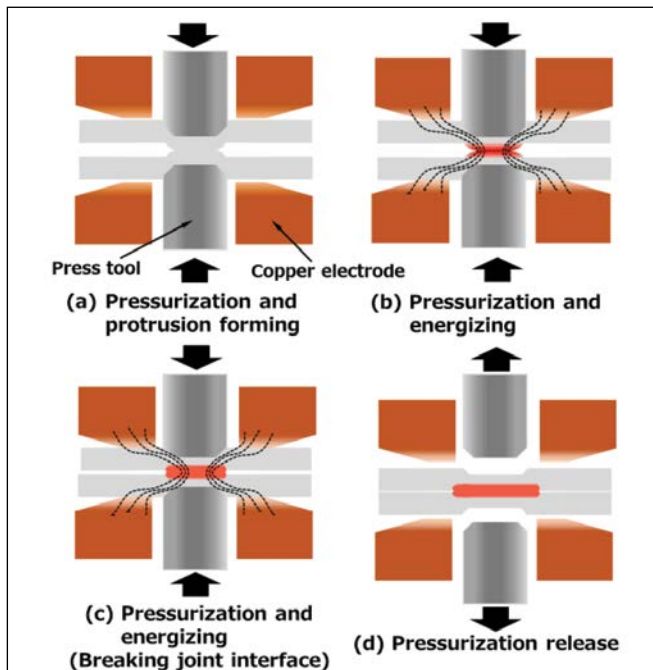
Principle of Cold Spot Joining (CSJ) process.
